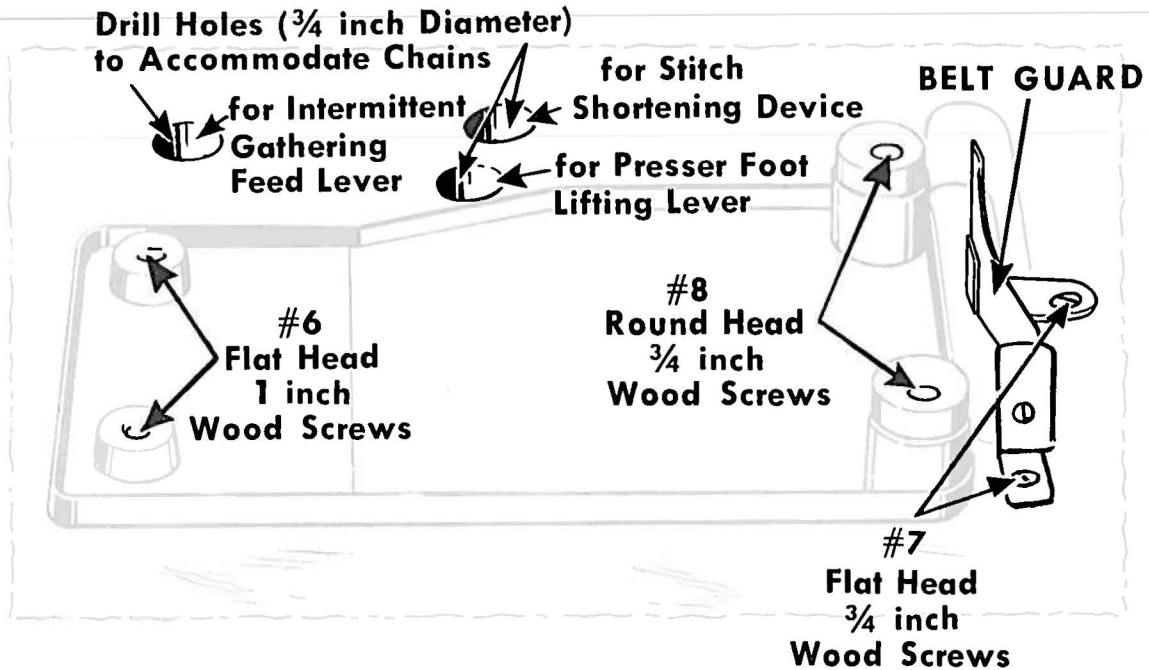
Machine Base on Table, Showing Position and Drill Sizes of Holes Required for Installation
